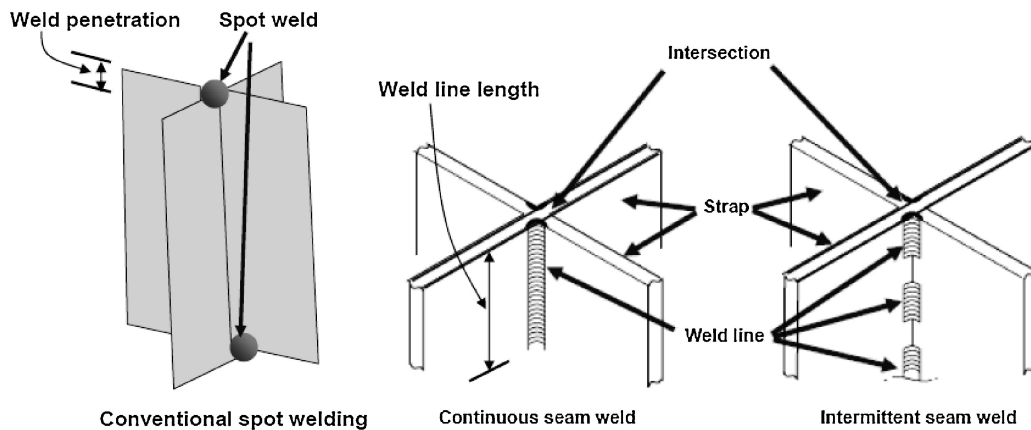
Weld line for the proposed LASER welding techniques
